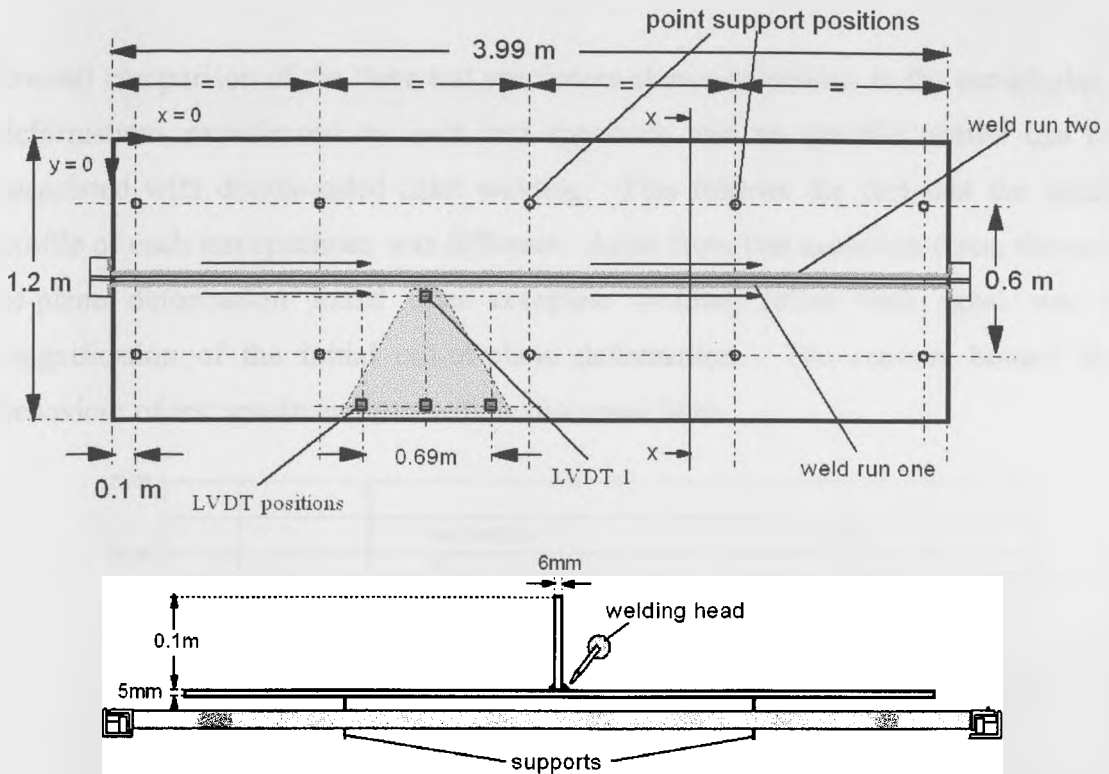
Layout and set-up in fillet welded attachments
